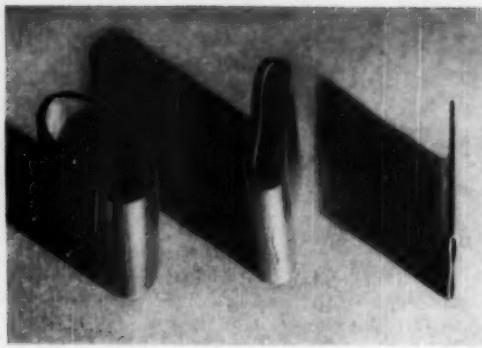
Flattening Tests on Welded Titanium Tubing. Left to right: As welded, welded and annealed, and redrawn and annealed
